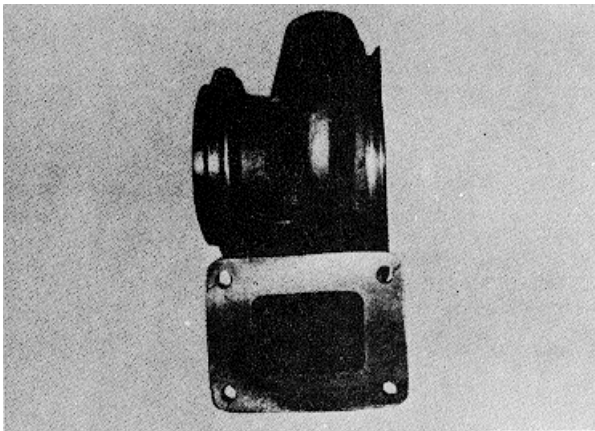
, T-399. Cracks in turbine casing mounting flange
